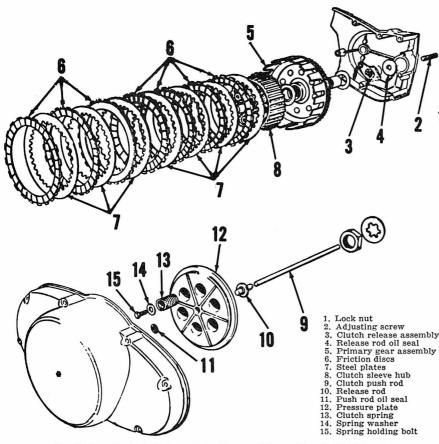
Exploded view of clutch assembly used in the T500 Suzuki.
